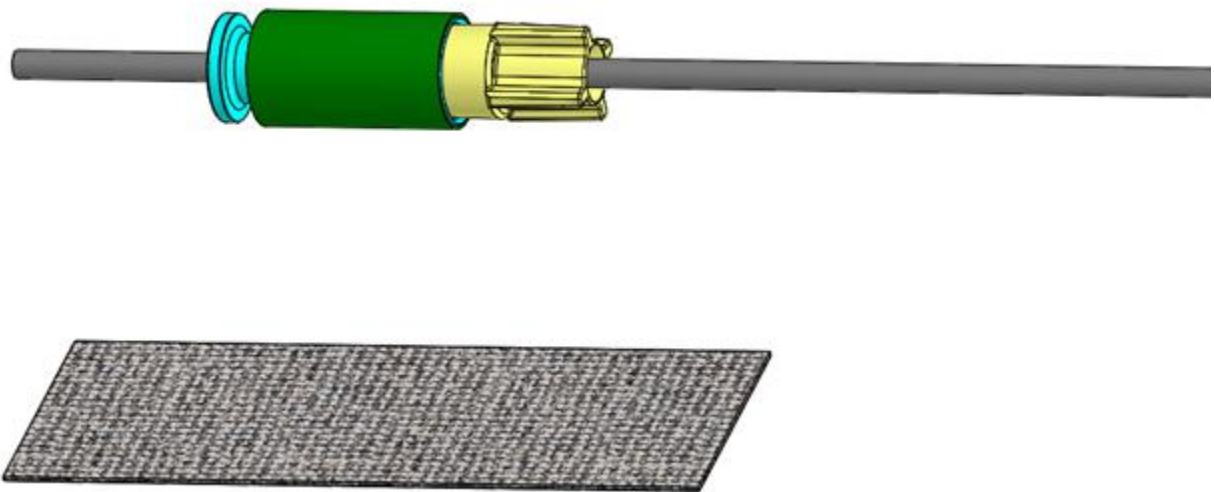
shows the catheter with the *CaTHSTiX* assembly ready to be secured to the attachment pad.
